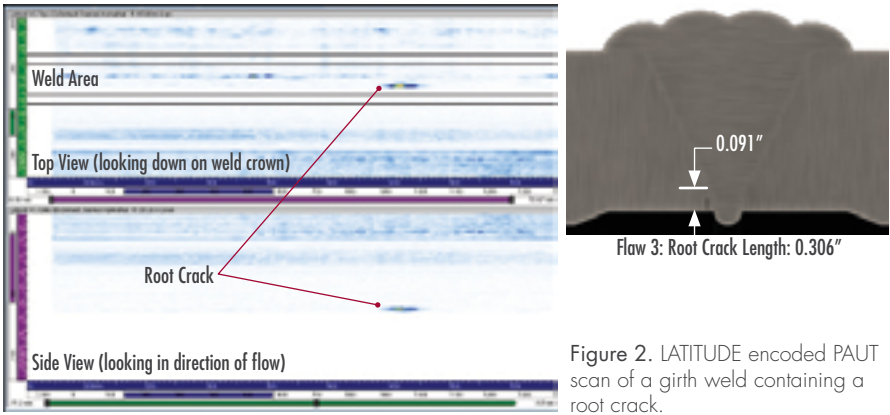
LATITUDE encoded PAUT scan of a girth weld containing a root crack.
